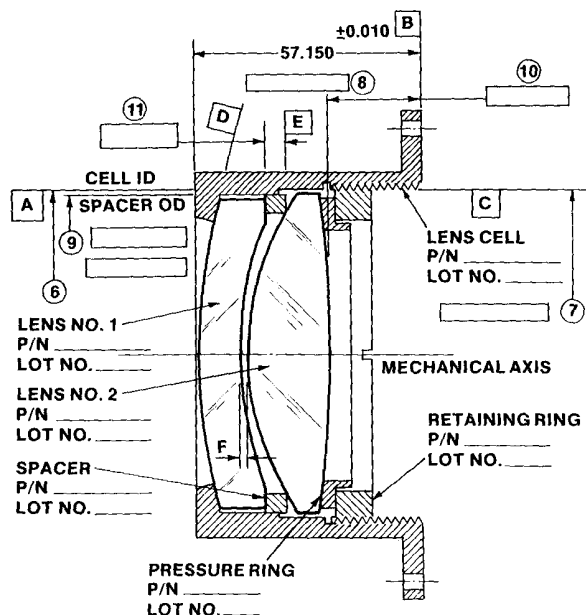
Illustration of opto-mechanical assembly by lathe assembly process.
